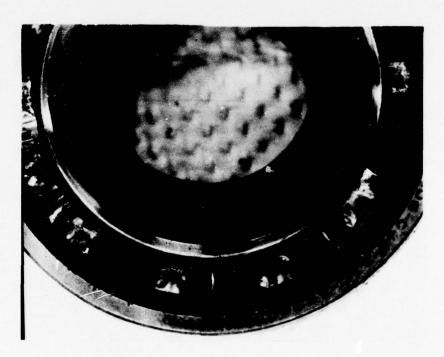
Bearing S/N TRL-8. Removed Position 6 With 2.4 Hours Time. 2.5x Enlarged View.
